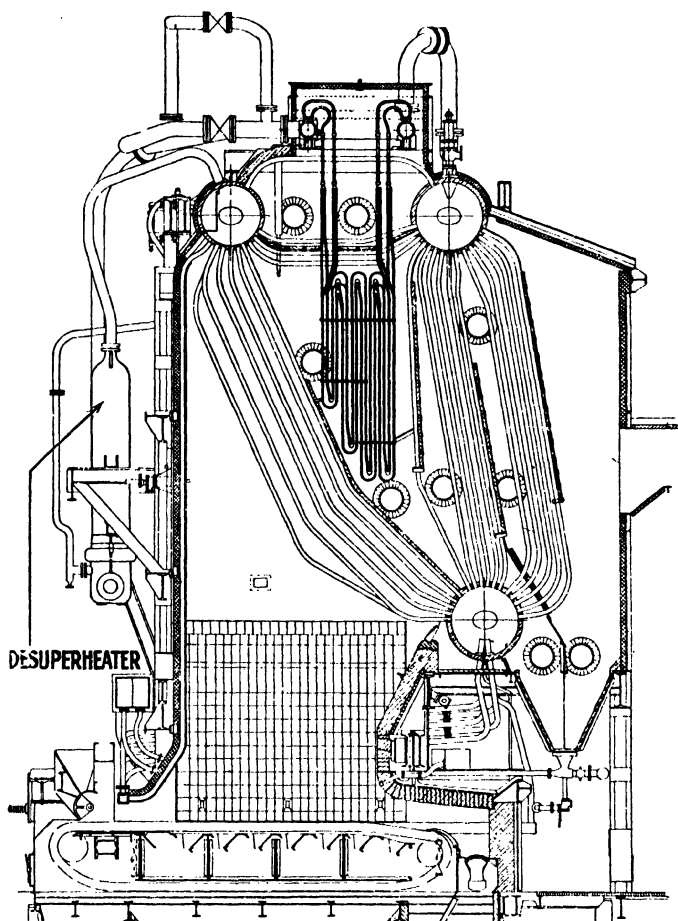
Arrangement of 'McLeSoo' Inter-Controlled Superheater, showing Desuperheater.
